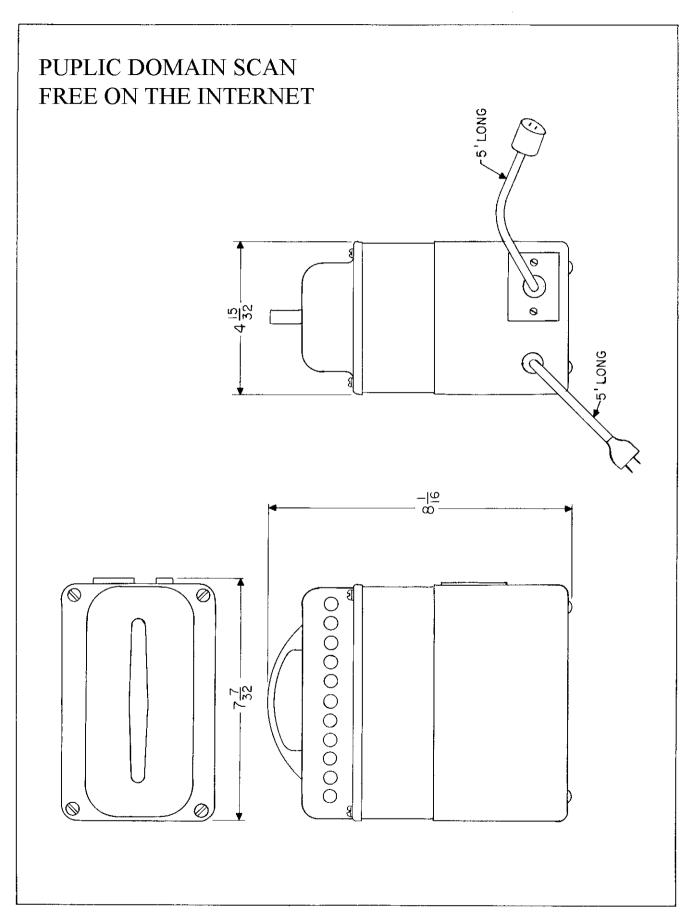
Outline Dimensional Drawing, Constant-Voltage Transformer, T-3003A-7,
